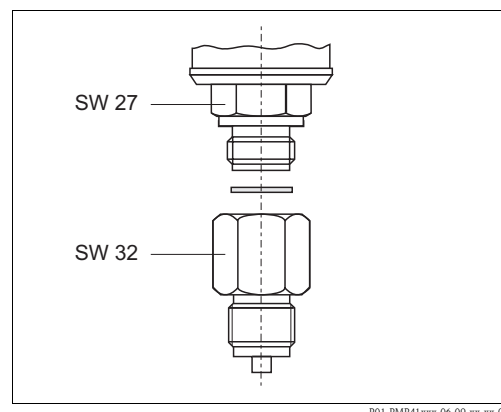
The flush-mounted version is screwed together with the adapter using a torque of 50 Nm. Screw the complete device into the process thread with max. 80 Nm (at AF 32).
